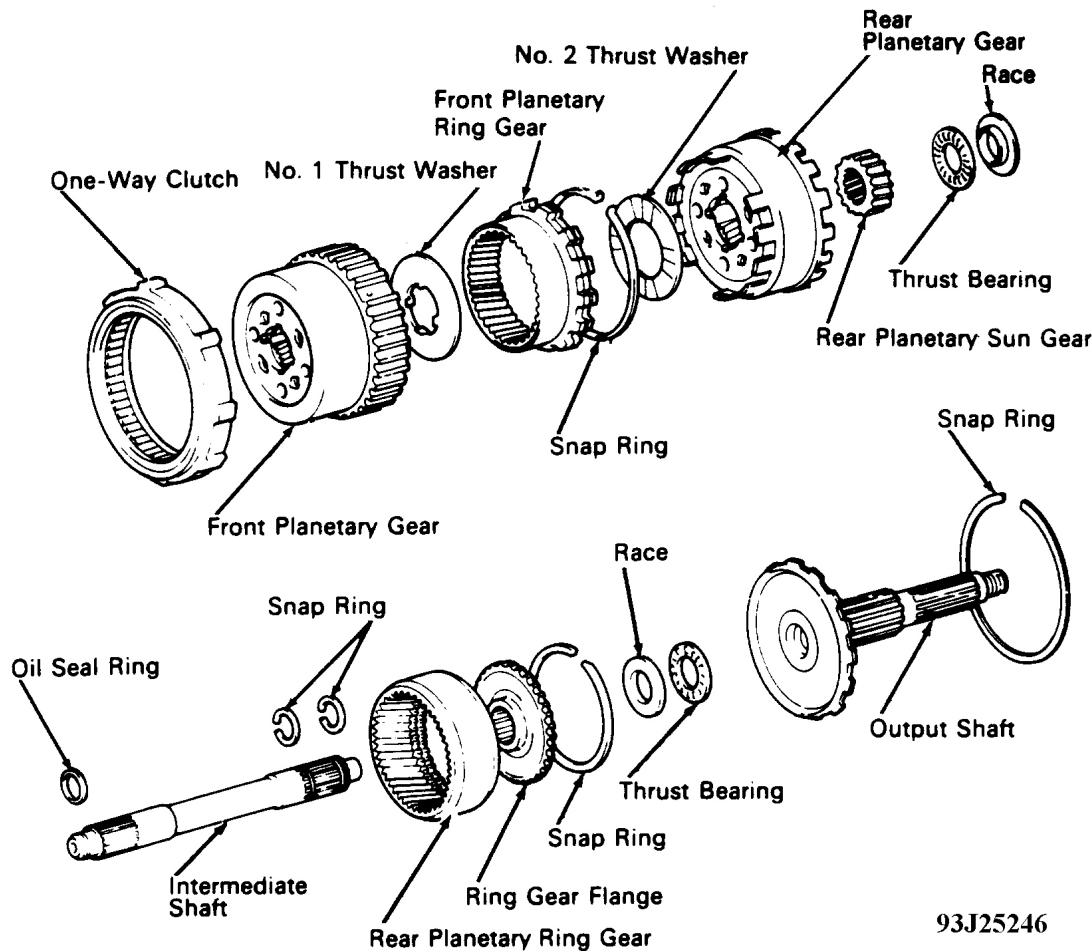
Exploded View Of Planetary Gears, One-Way Clutch & Output Shaft
